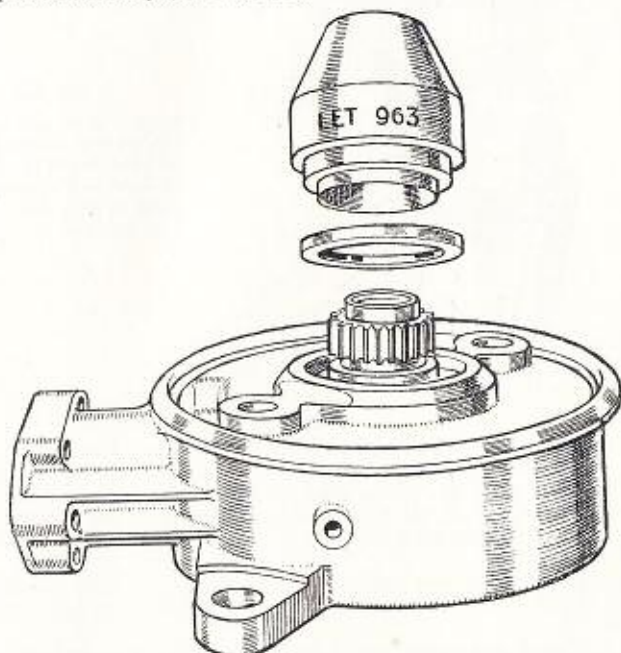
Using the Special Oil Seal Tool No. LET 963 for fitting oil seal to bevel casing.
